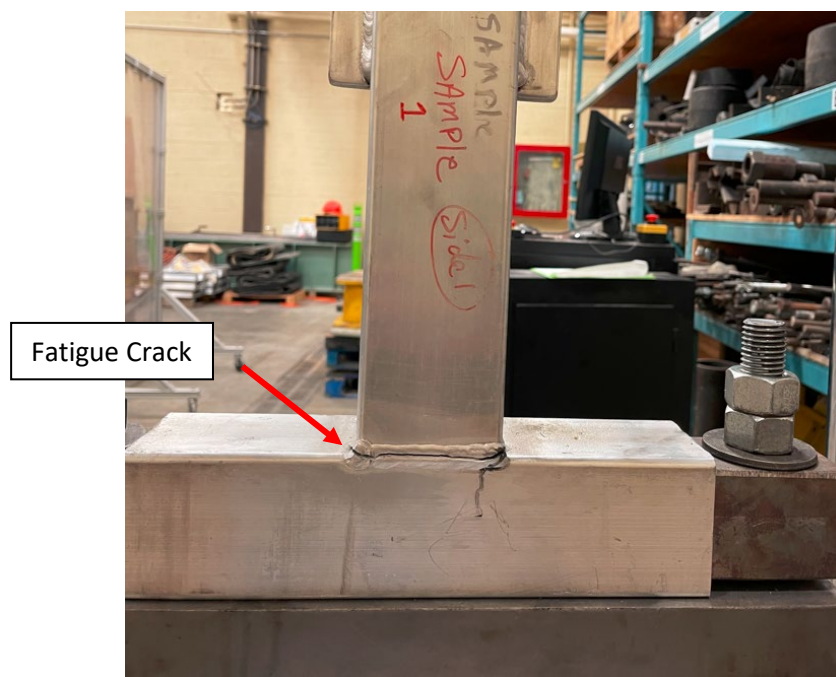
Fatigue cracking in the weld of an R4.8 sample.
